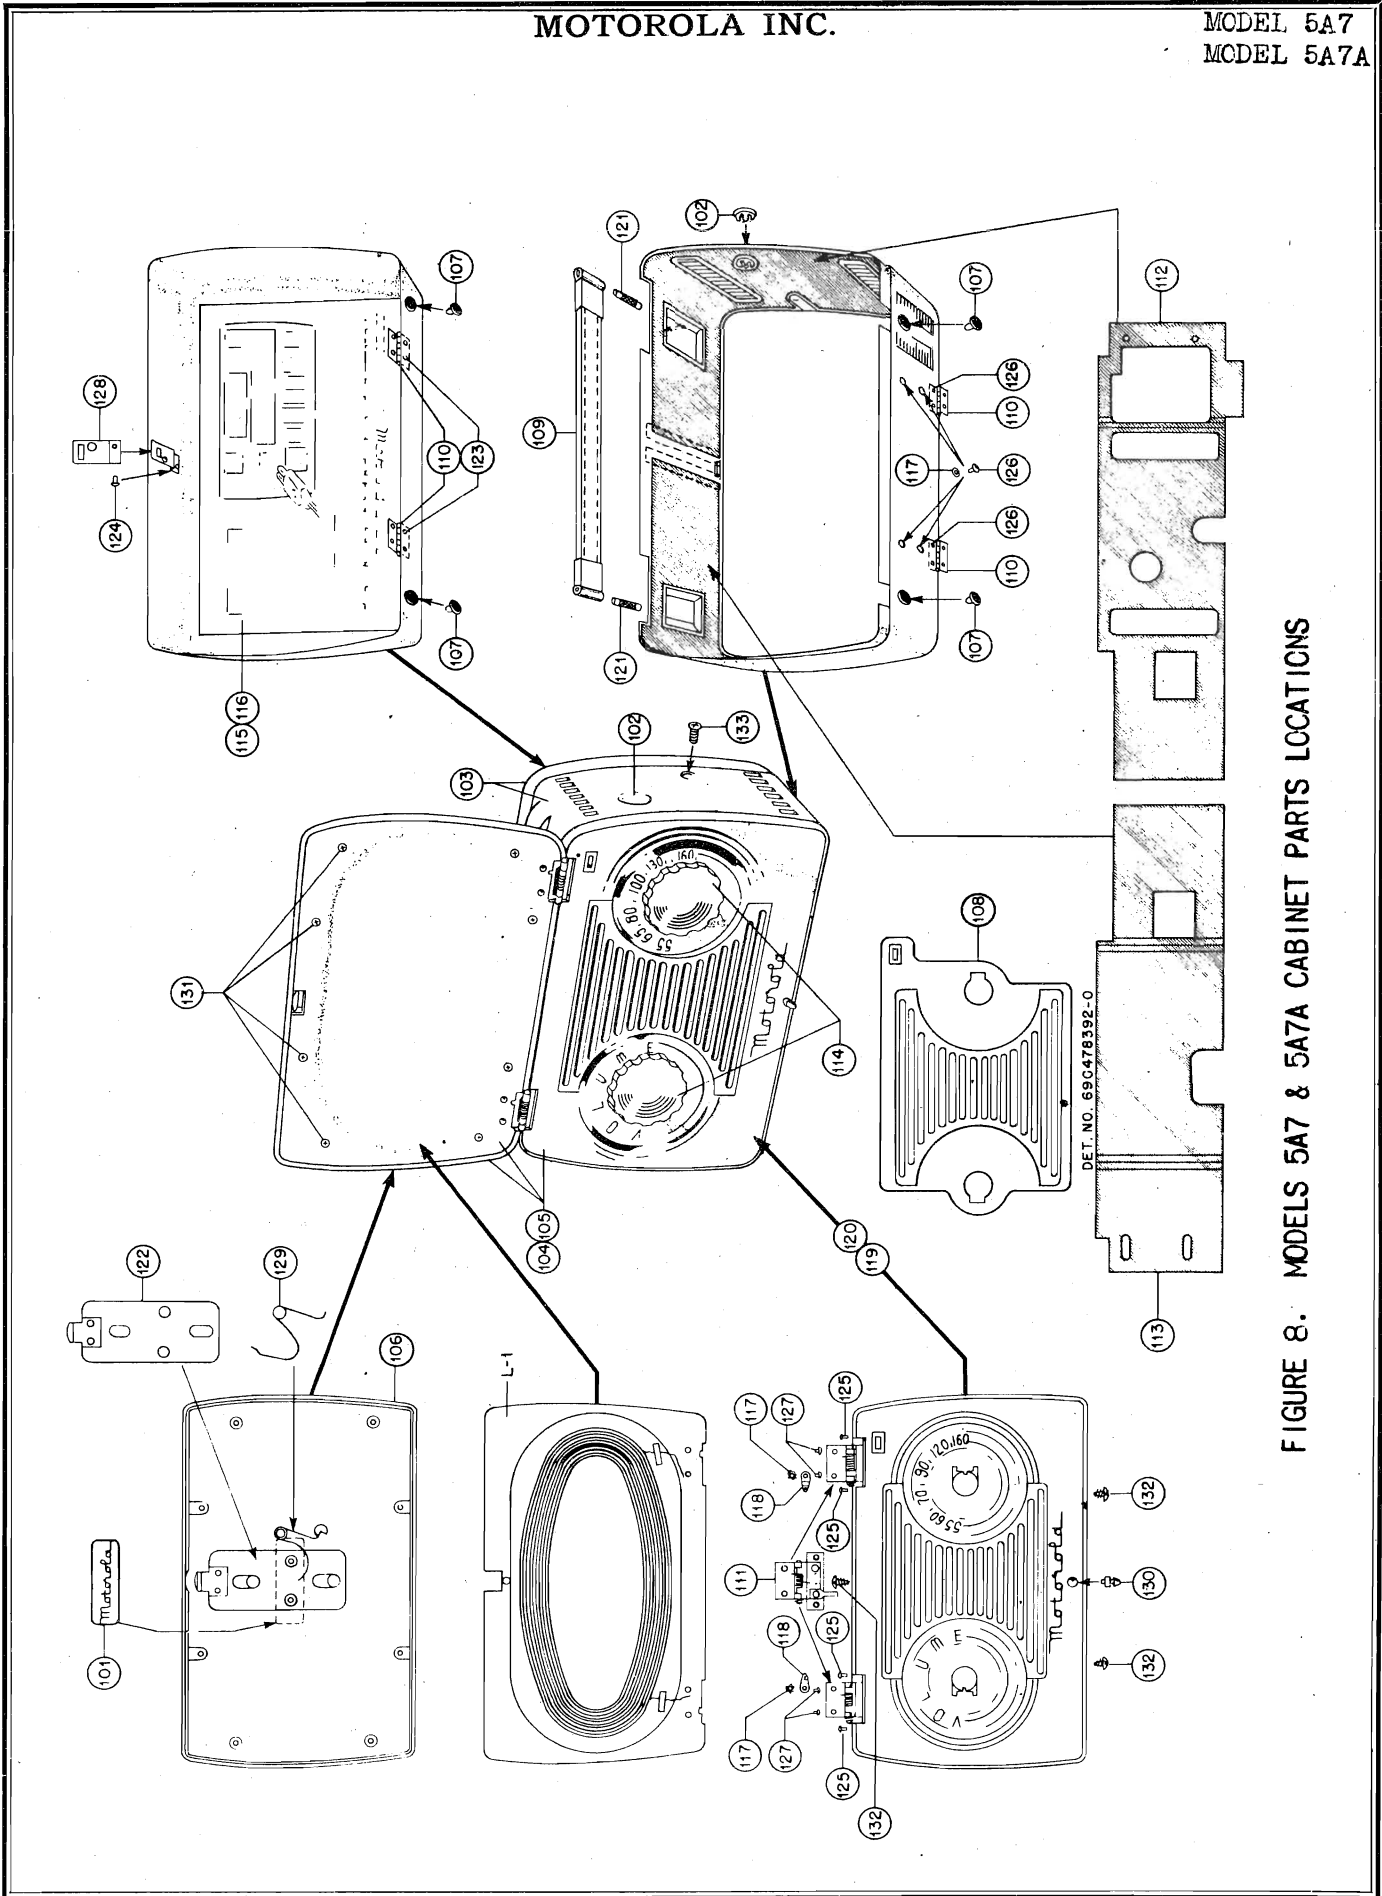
MODELS 5A7 & 5A7A CABINET PARTS LOCATIONS
